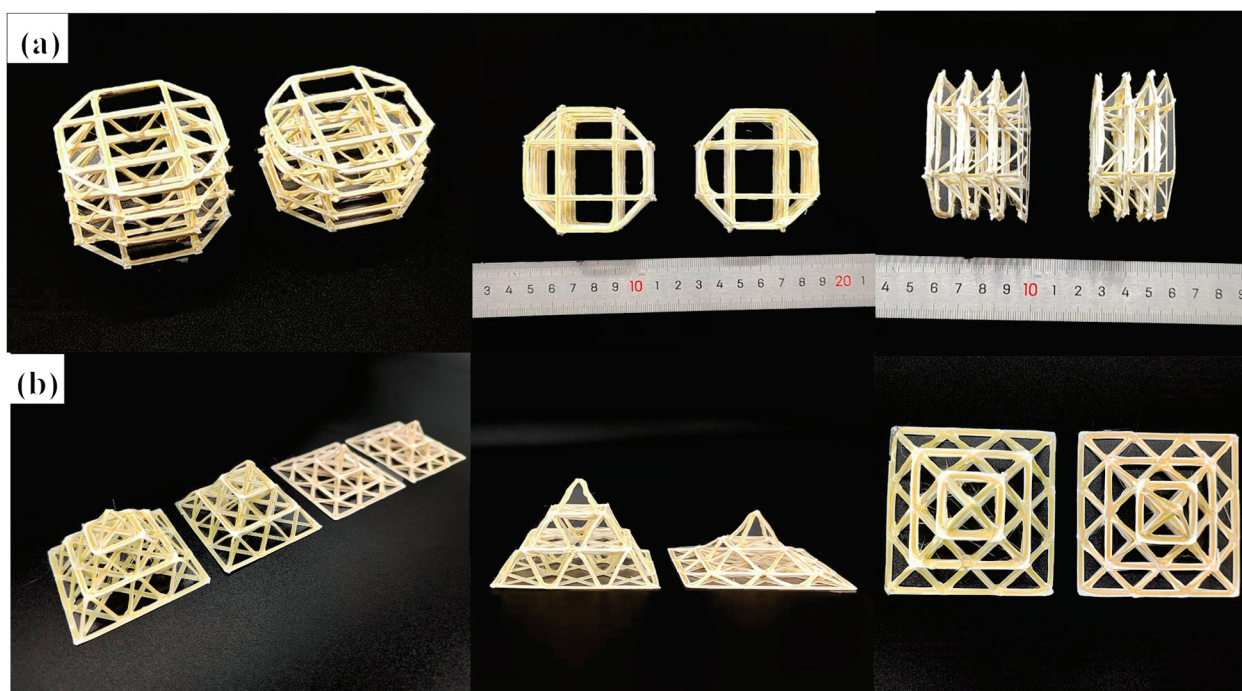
Samples of multilayer truss structure: (a) vertically stacked three-layer truss sample (uniform structure design and non-uniform structure design per layer), and (b) 45° connected stacked three-layer truss sample (uniform structure design and non-uniform structure design per layer).
